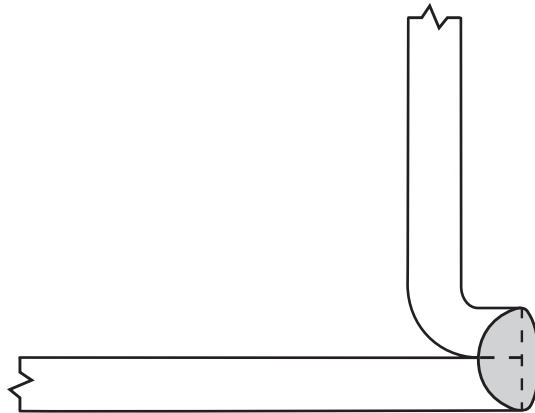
(Continued)—Double-Groove Weld Types
